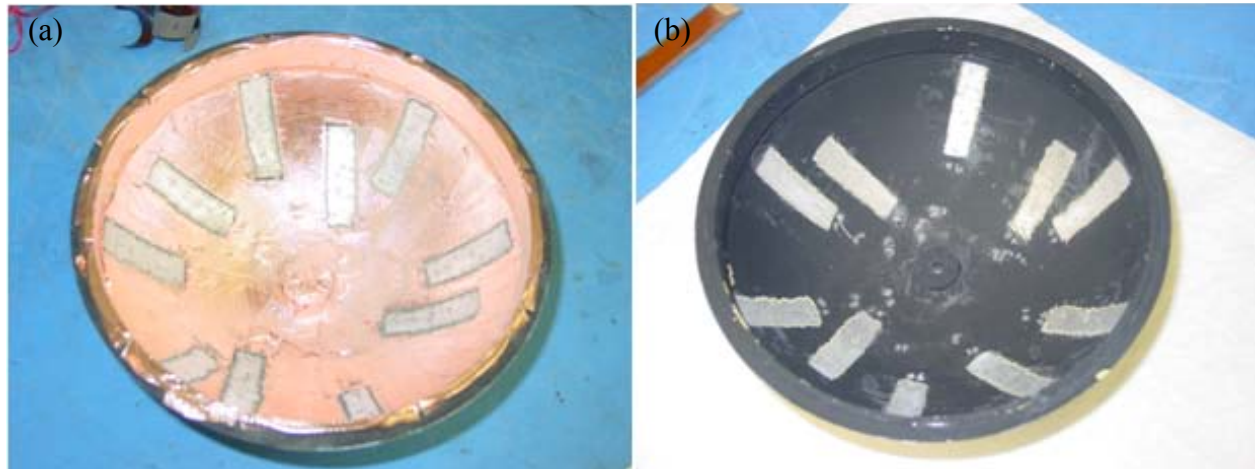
(a) Copper tape installed and the heater areas ground to the aluminum. (b) Copper tape removed and cleaned with IPA.
